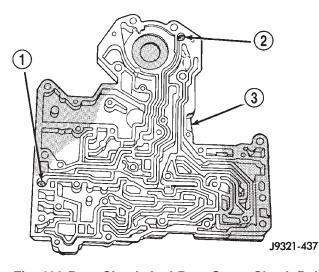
Rear Clutch And Rear Servo Check Ball Locations
